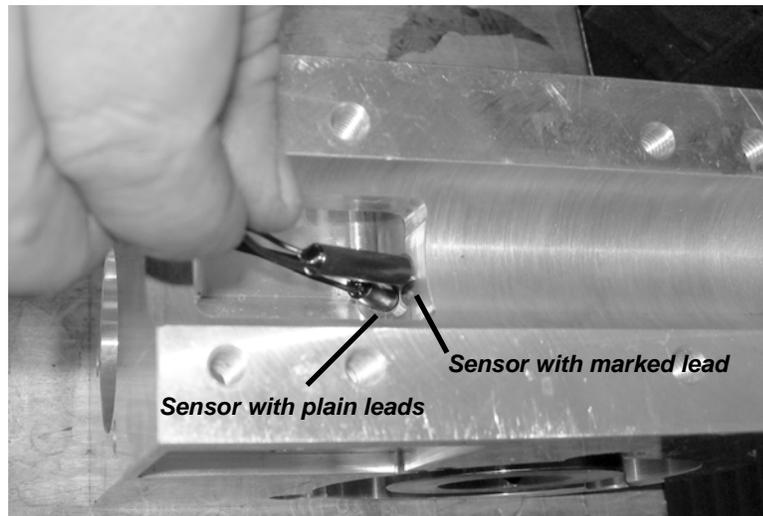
Insert the two sensors into the holes leading into the machine shaft cavity.
